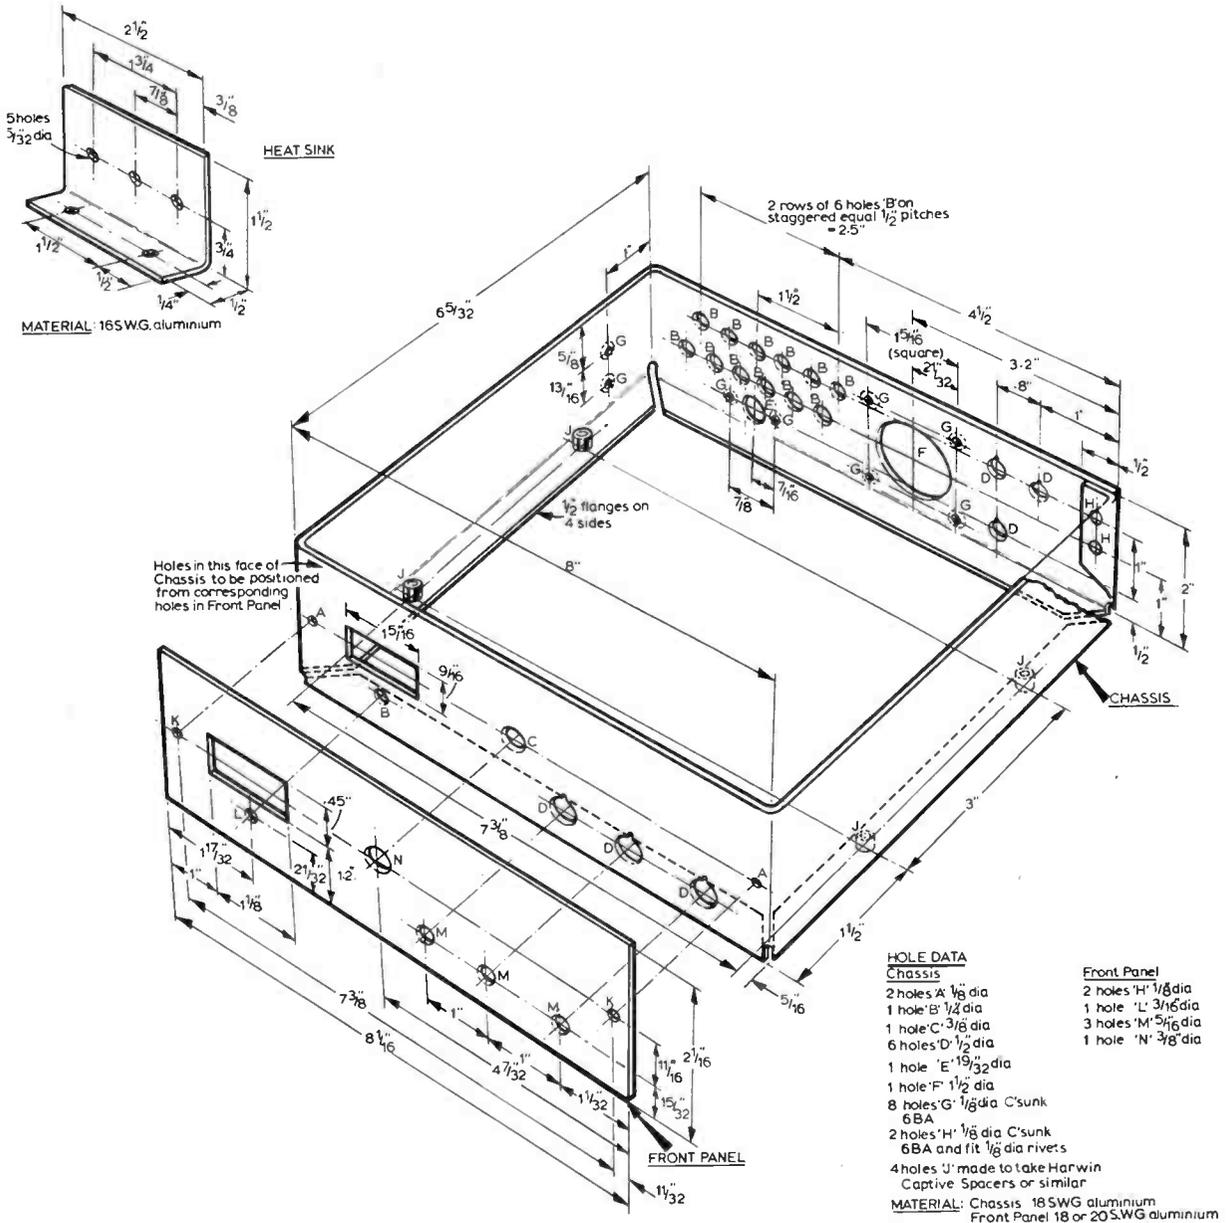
Details of chassis construction and drilling with the heat sink shown top left, front panel left.
